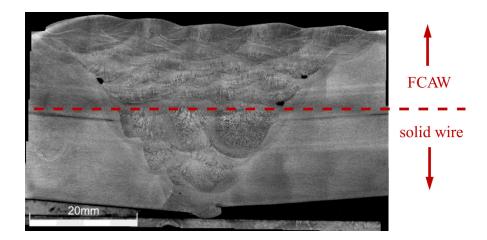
The macro-metallography of simulated GMAW weldment (Upper is flux cored wire ; Bottom is GMAW-solid-wire)
